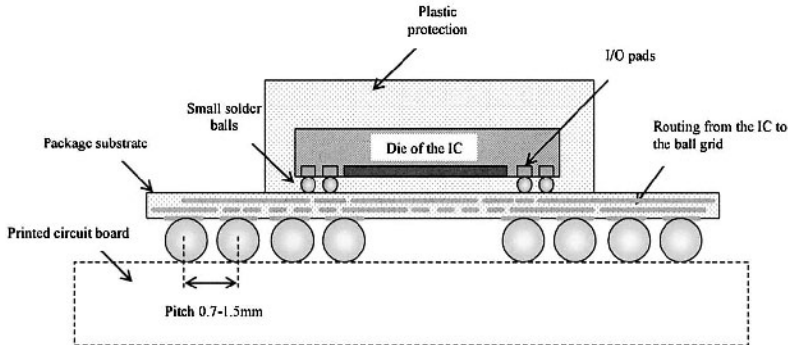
The die is attached to the package using micro balls, then the package is linked to the PCB via solder balls to the printed circuit board (BGA).
